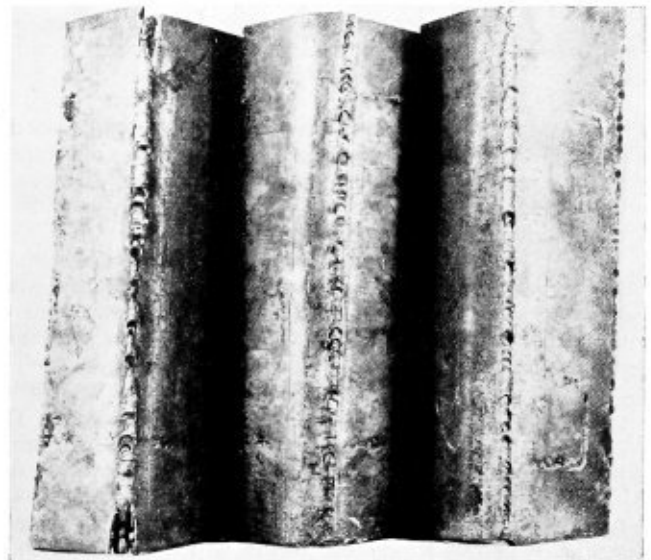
Test welds of vertical, horizontal and overhead seams, bent 90 degrees
